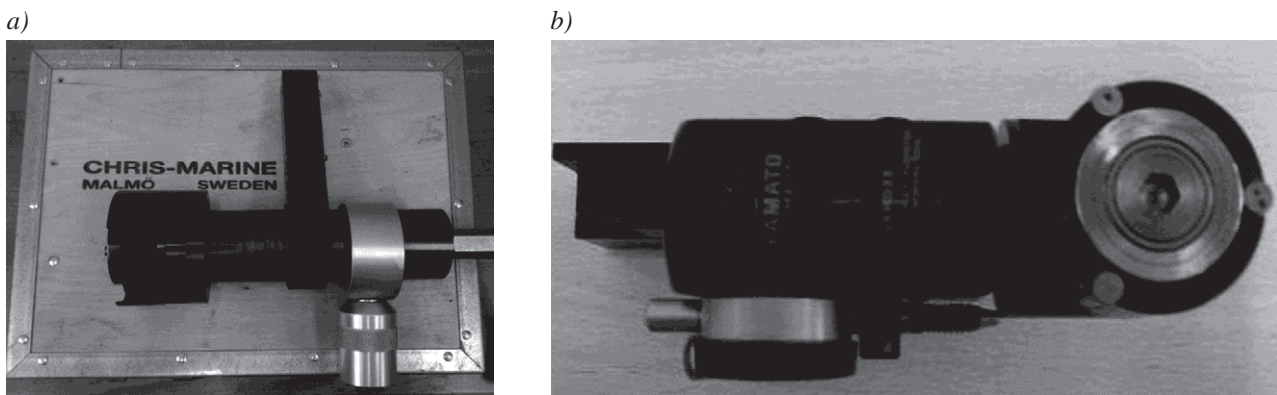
Grinding attachment for lathes (a) and burnishing tool (b)
